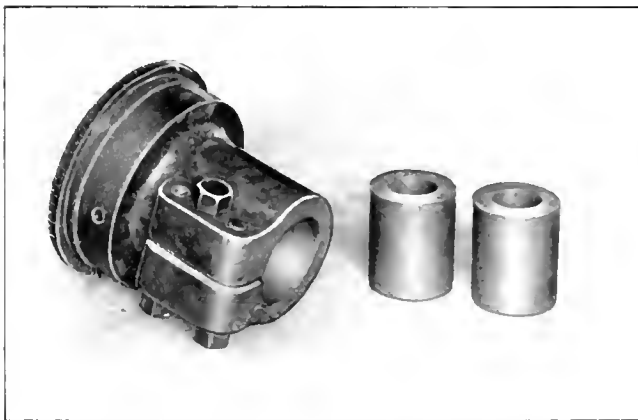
Holder and Bushings for Finish Turning Crank-pins
